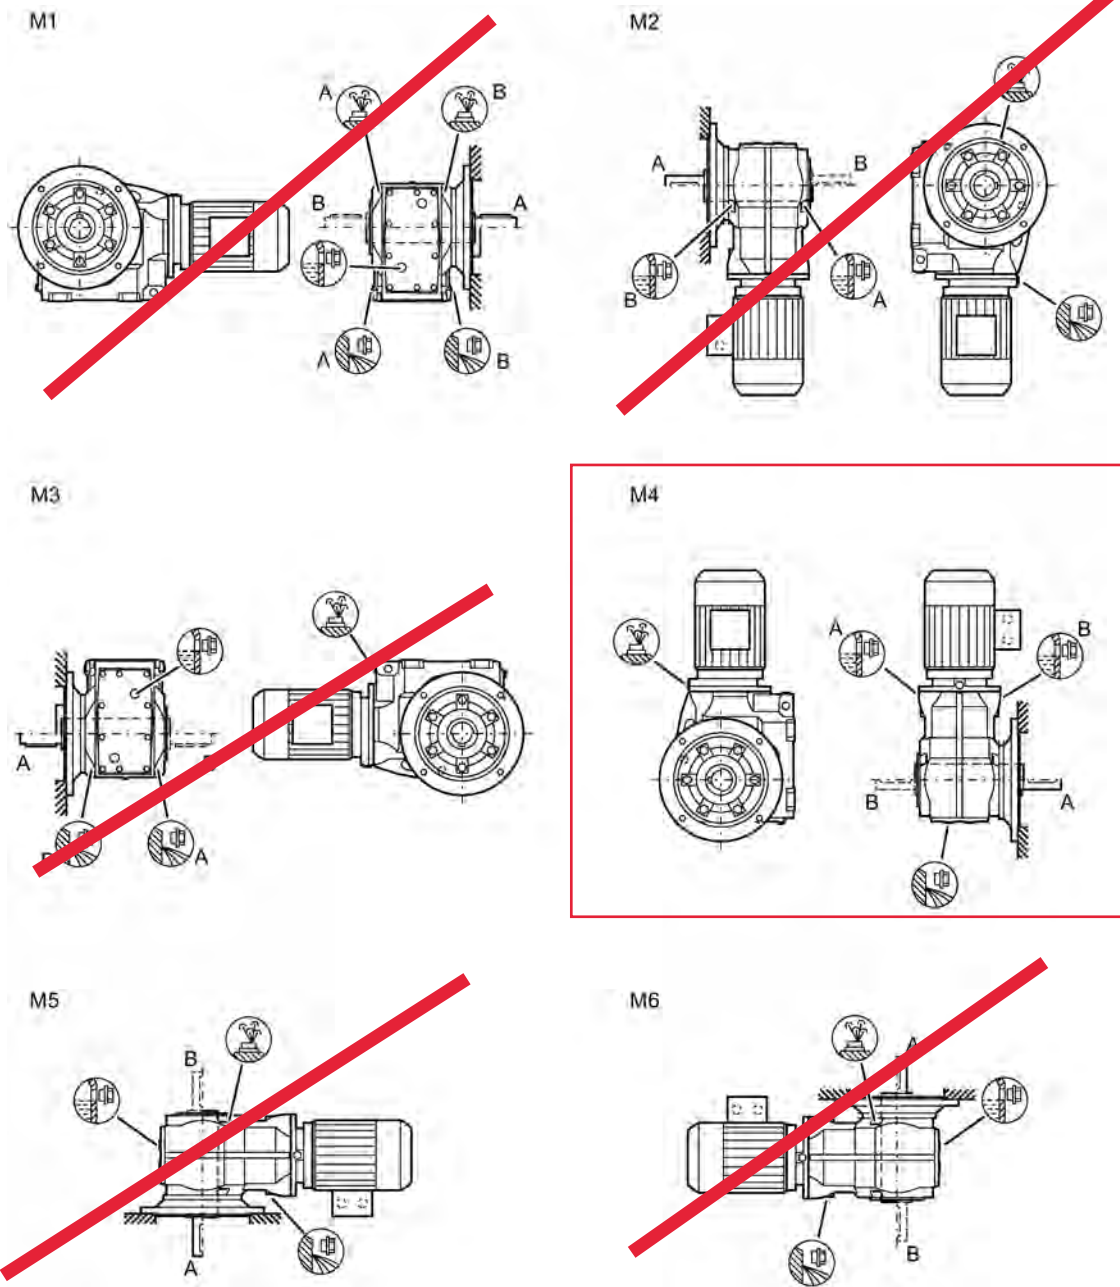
Mounting positions for bevel gearbox K.F flange-mounted design and KAZ with housing flange, sizes 39 - 189
